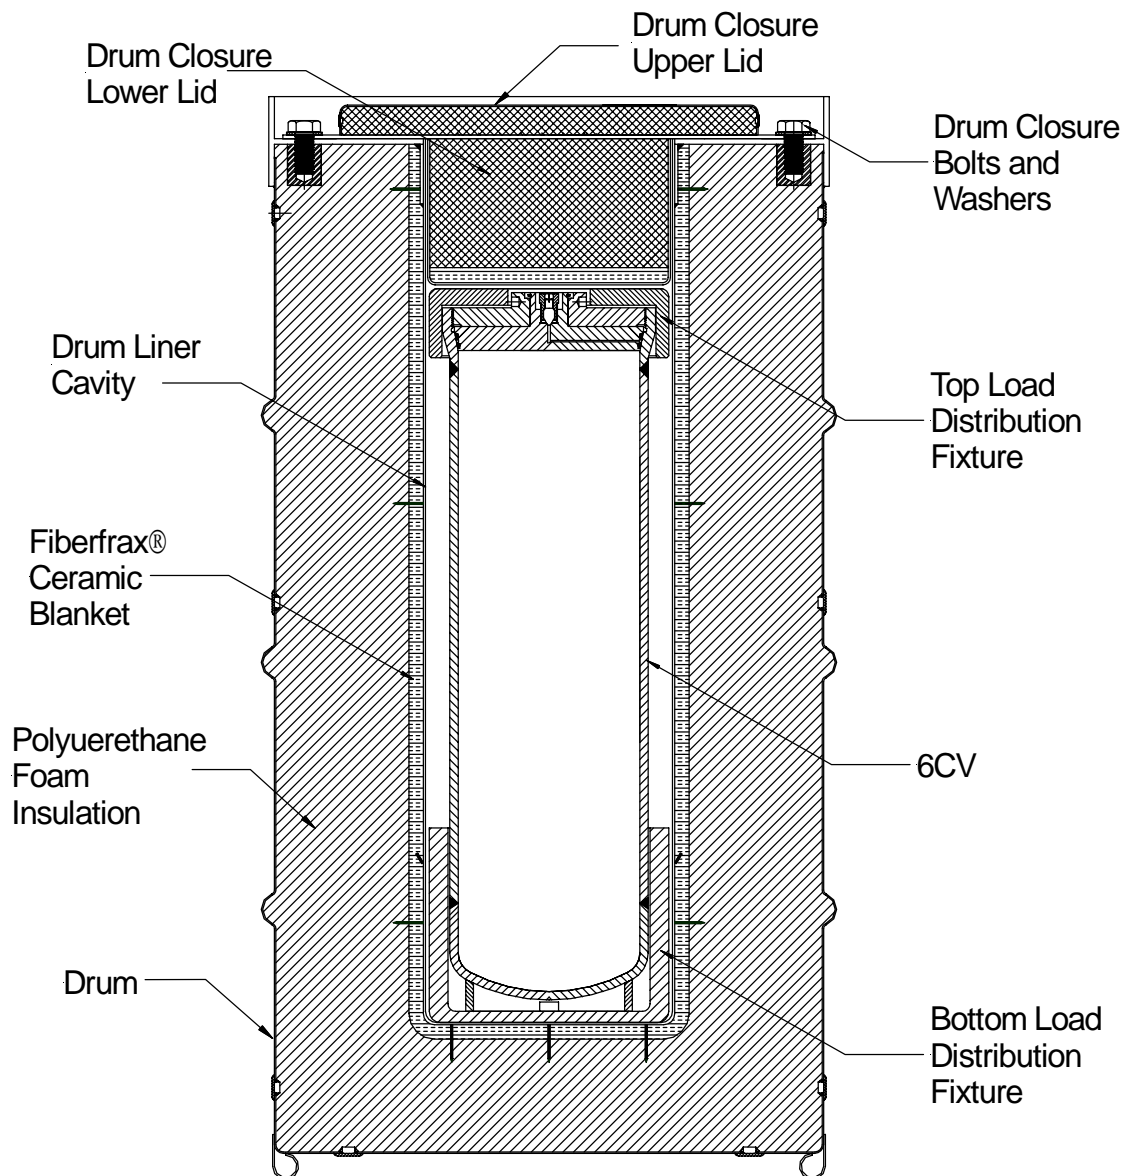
Assembly Cross-Section of 9977 Packaging with 6CV
